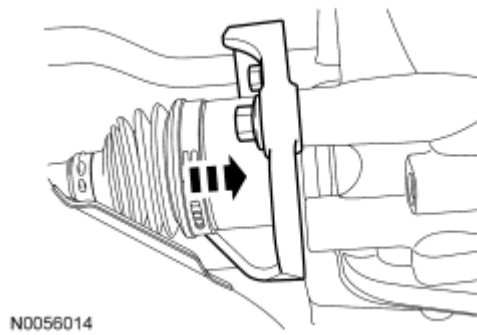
Installing Stub Shaft In Rear Drive Unit
